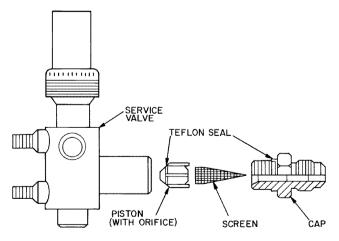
AccuRater Metering Device at Service Valve (Bypass Type Components); Heating
